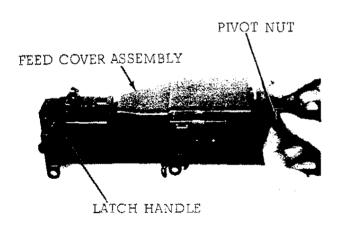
REMOVING THE FEED COVER PIVOT NUT AND SCREW
